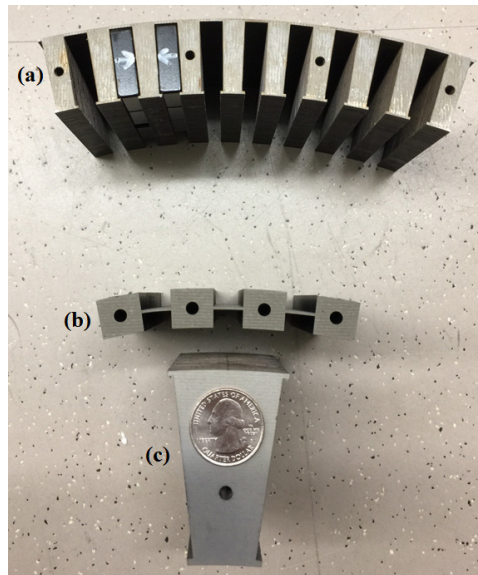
Rotor lamination parts for (a) outer rotor (b) cage rotor and (c) inner rotor.
